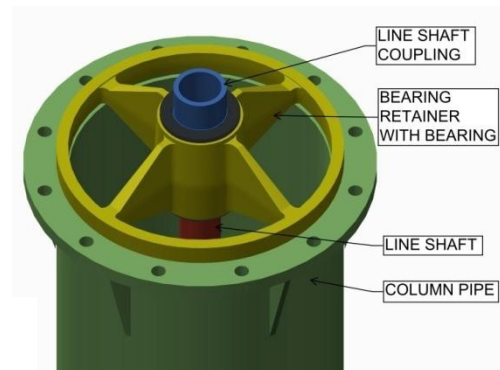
Assembling Bearing Retainer and Line Shaft Coupling
